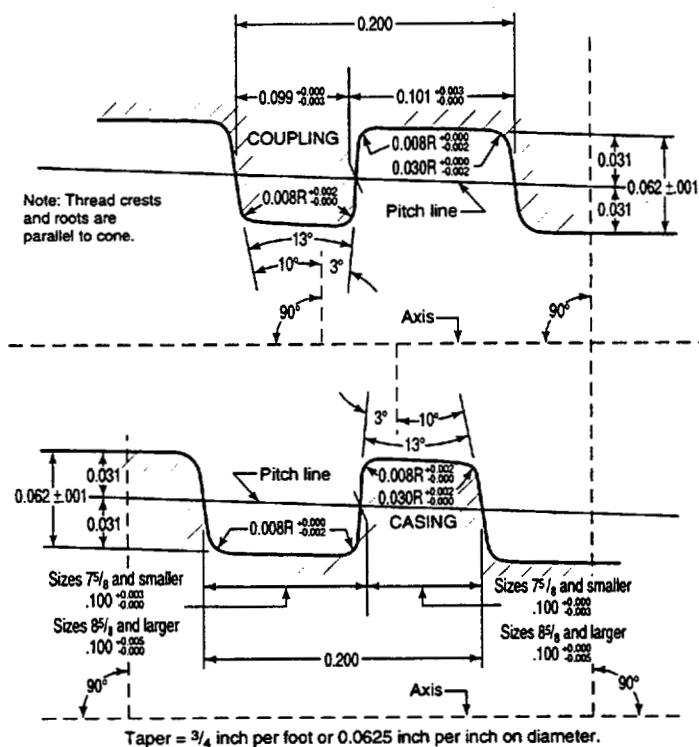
Buttress Casing Thread Form and Dimensions—for Casing Sizes $4\frac{1}{2}$ through $13\frac{3}{8}$ in.
